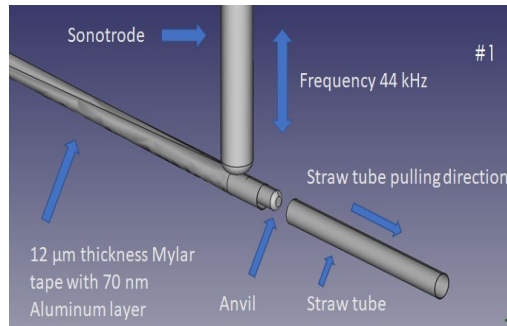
Straw tube manufacturing process using ultrasonic welding technology.
